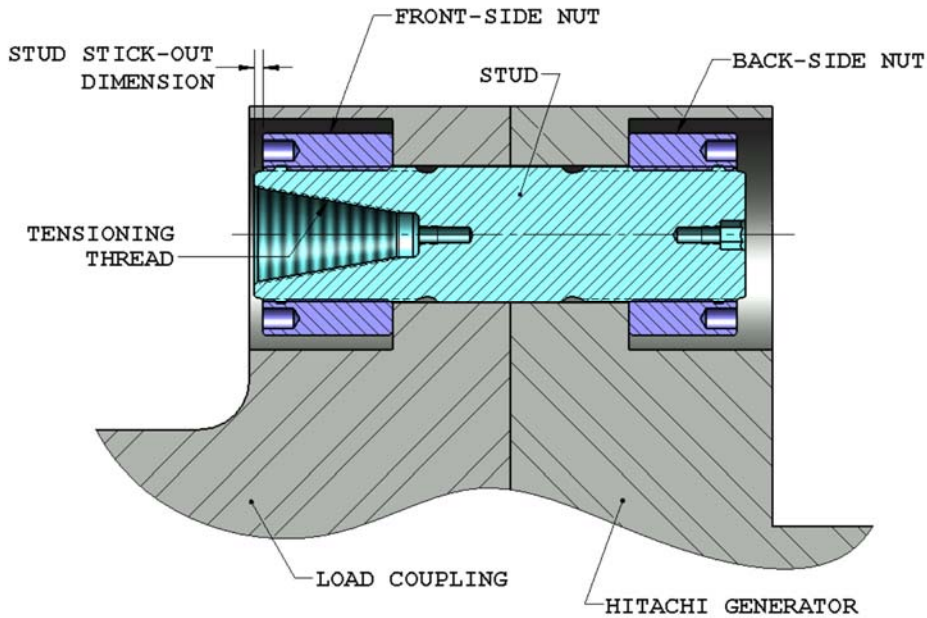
Cutaway View of Load Coupling to Hitachi Generator Bolted Joint
